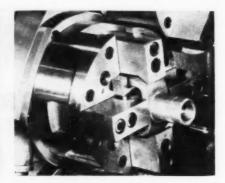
Illustration of steel forging being held in four-jaw chuck.
